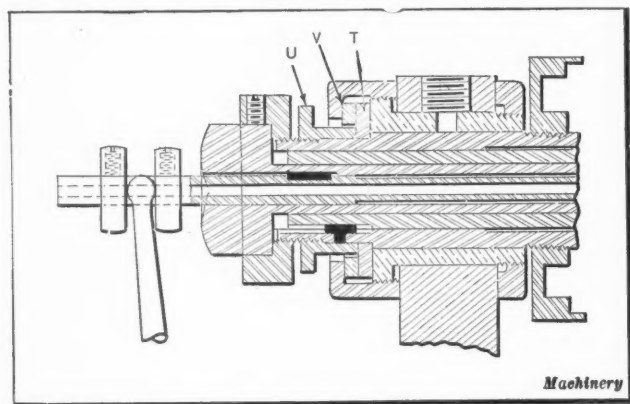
Rear Bearing of Spindle shown in Fig. 1 with Improved Means of taking up End Thrust
